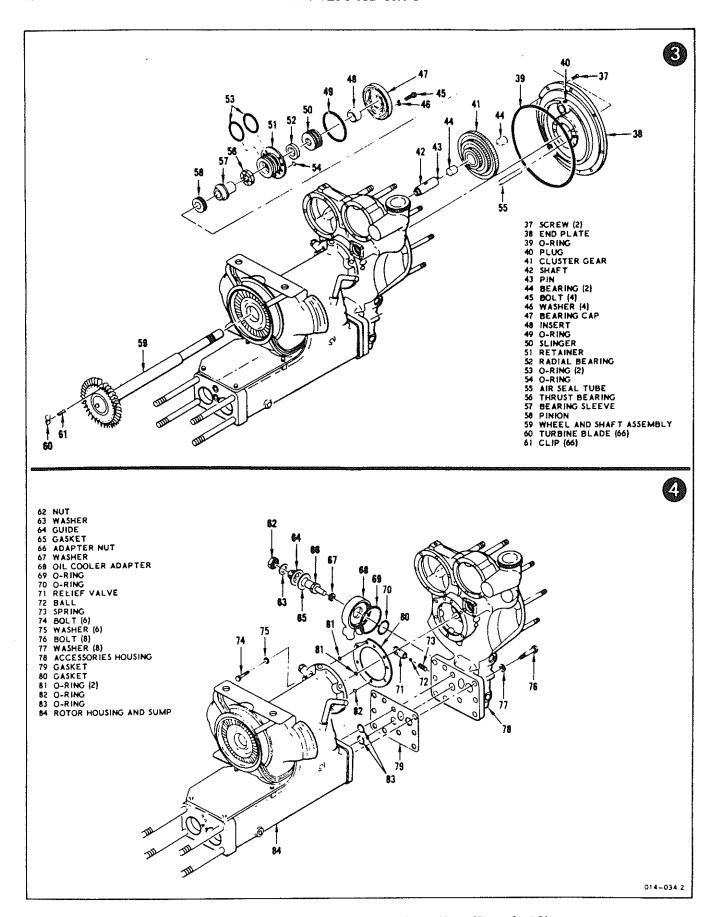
Gas Producer Section, Exploded View (Sheet 2 of 2)
